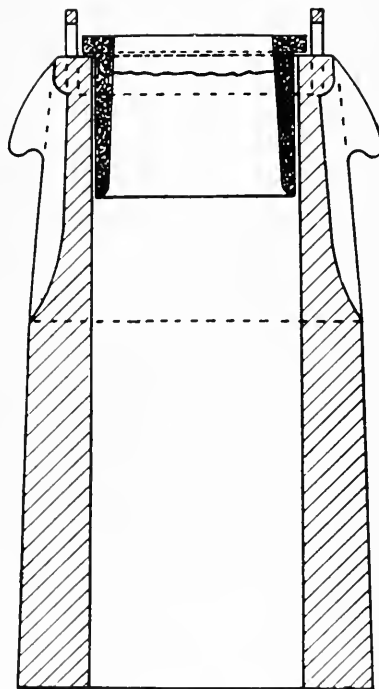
Gathmann Ingot Mould with Clay Sink-Head.
